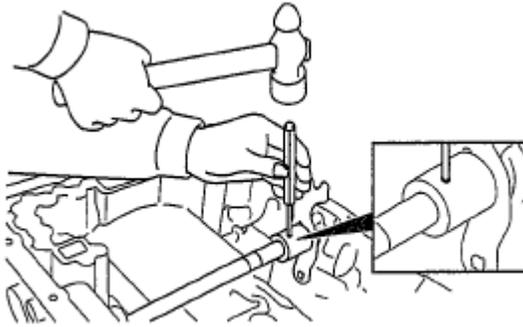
Removing Manual Shaft Washer Using Flathead Screwdriver And Hammer
